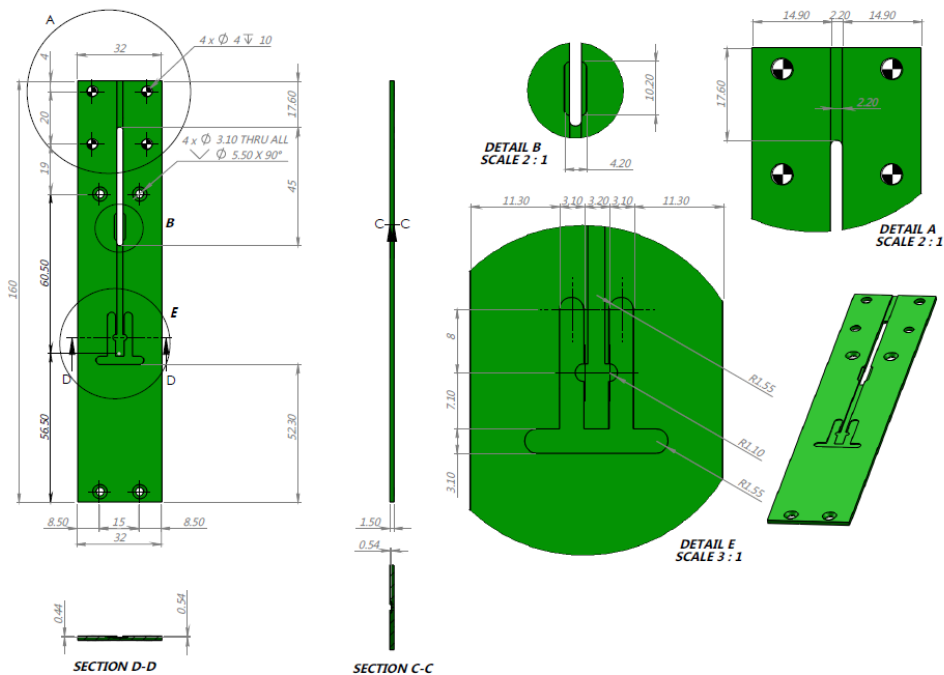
Dimensions of the SENIS Probe Holder PHS-S
